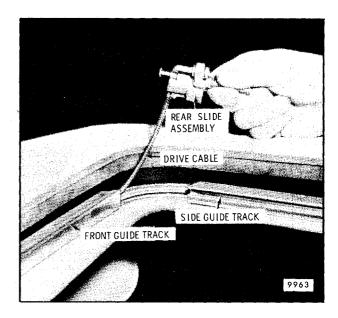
Rear Slide and Drive Cable in Front Guide - E and K Styles
